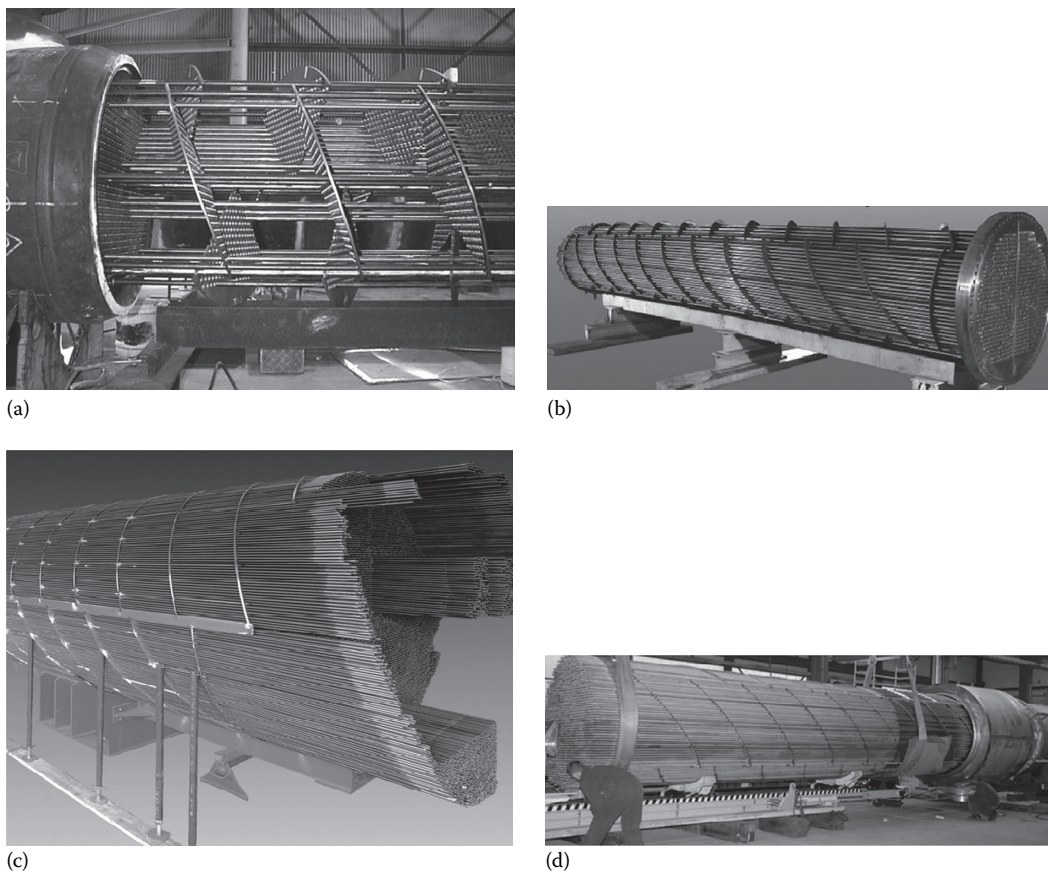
Helixchanger heat exchanger tube bundle assembly. (a) A section of tube bundle under assembly and (b) completed tube bundle assembly. (a and b: Courtesy of Lummus Technology Heat Transfer, A Division of Lummus Technology Inc., Bloomfield, NJ.) (c) Helixchanger tube bundle under assembly and (d) Helixchanger tube bundle assembly is inserted into the shell. (c and d: Courtesy of Vermeer Eemhaven B.V., Rotterdam, the Netherlands.)
